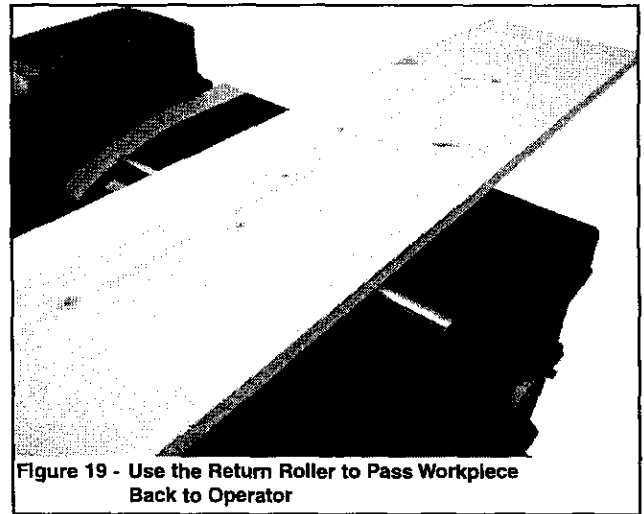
Use the Return Roller to Pass Workpiece Back to Operator
